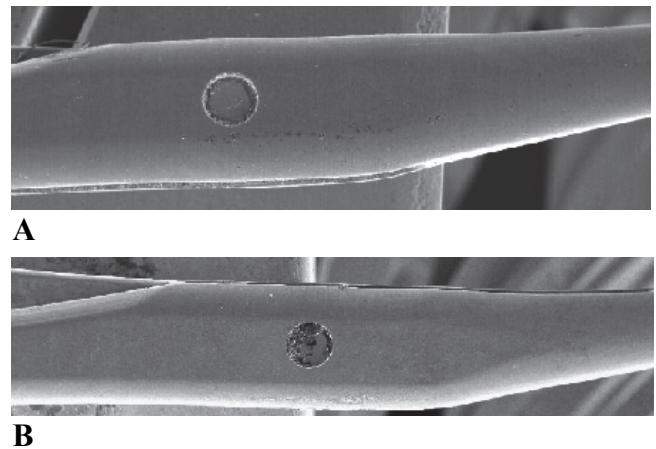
A- 10x-Rivet side view 0 courses B-12x-Rivet side view 13.492.242 courses
